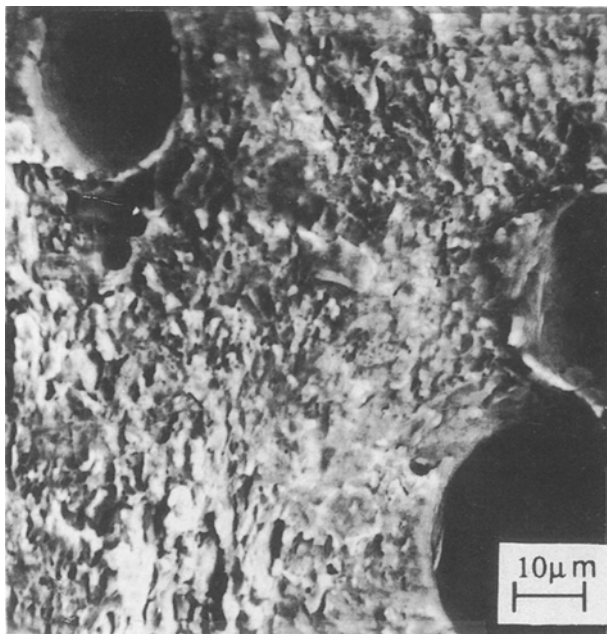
Scanning electron micrograph of tensile fracture of weld metal illustrating weld zone porosity for the 50° orientation sample.
